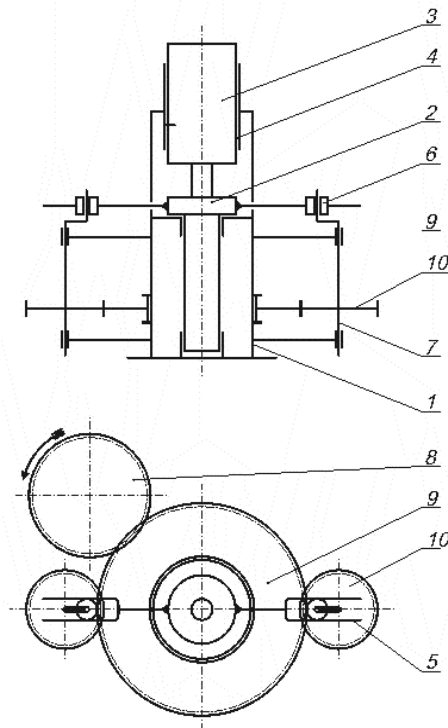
Schematic illustration of COT process: 1. Frame, 2. Lower punch, 3. Upper punch, 4. Non-rotating slidable bearing, 5. Lower punch arm, 6. Roller, 7. Crankshaft, 8. Driving gear, 9. Ring gear, 10. Gear wheel
